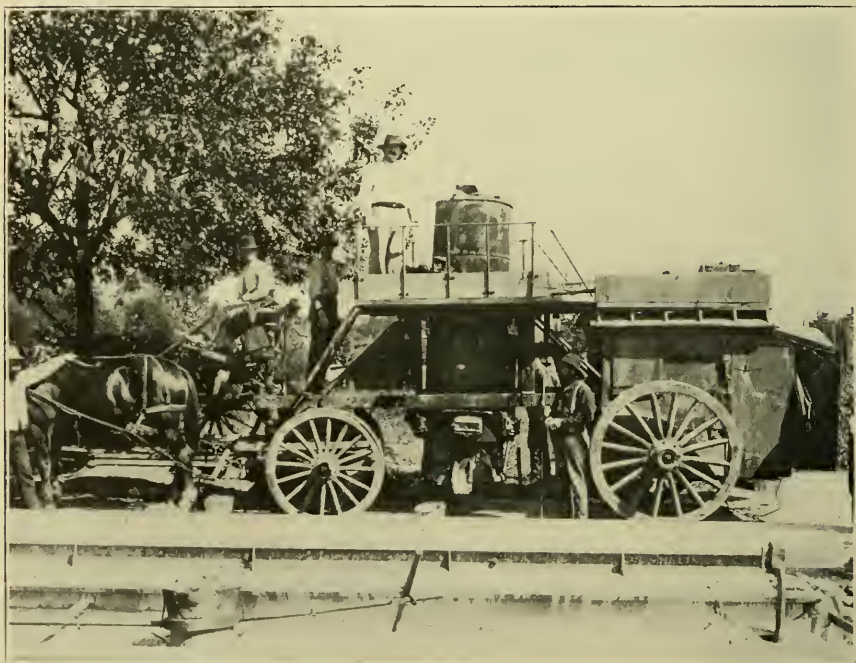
PORTABLE CUPOLA FOR CAST WELDING.
